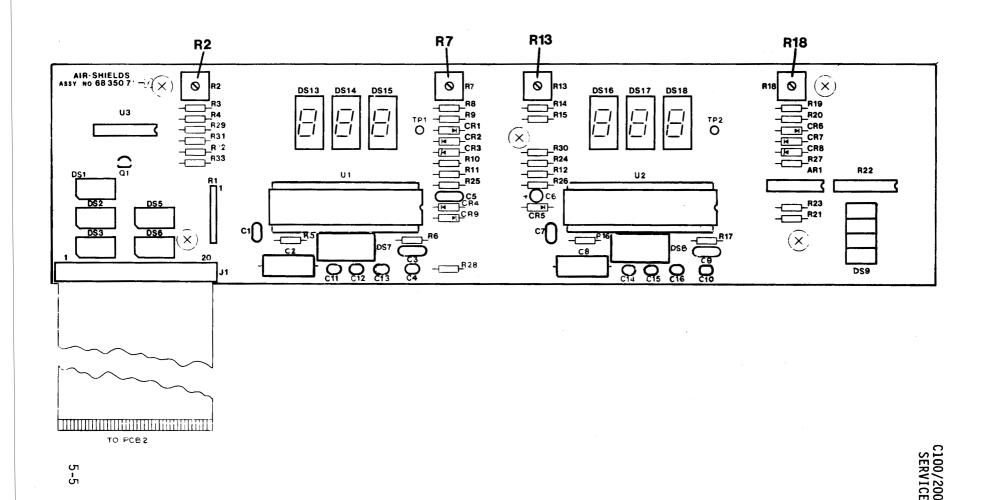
PCB1 (MODEL C100), LOCATION OF TEST POINTS AND ADJUSTMENTS
